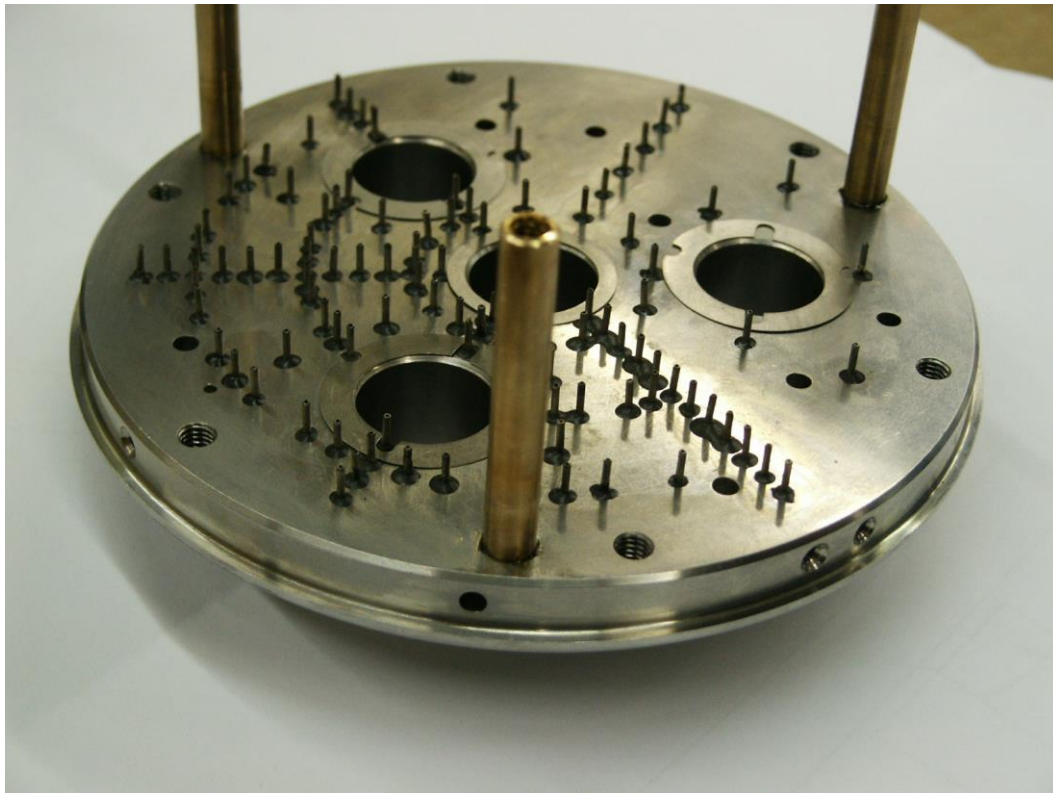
Backside of forebody showing pressure tube port posts and shims for inserts.
